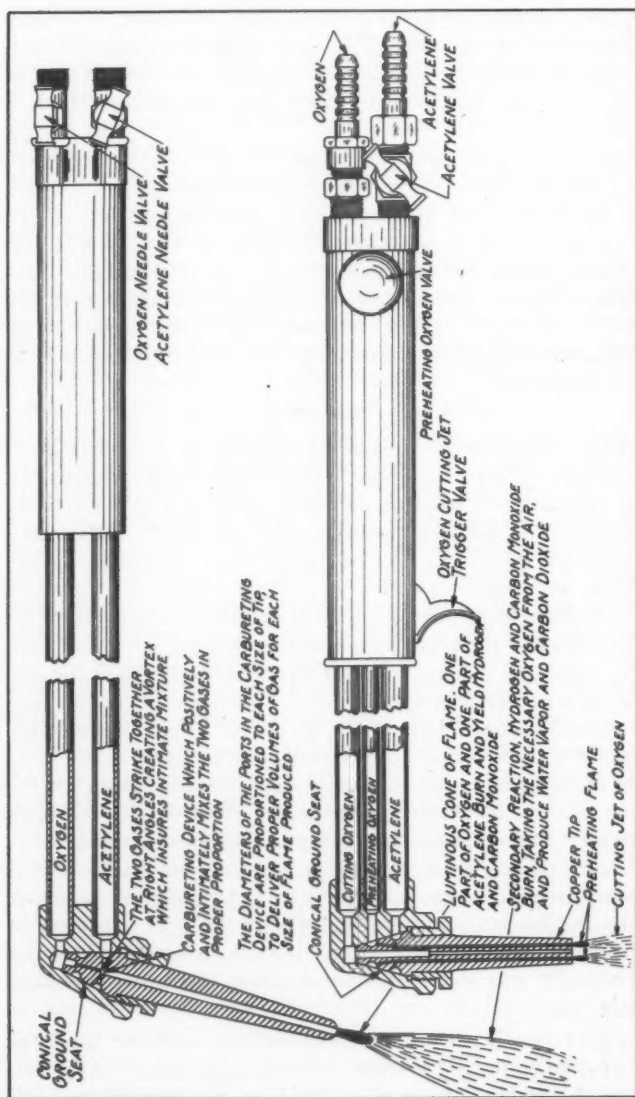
GENERAL ARRANGEMENT OF A PROPERLY CONSTRUCTED WELDING TORCH. FIG. 2—GENERAL ARRANGEMENT OF PROPERLY CONSTRUCTED CUTTING TORCH
